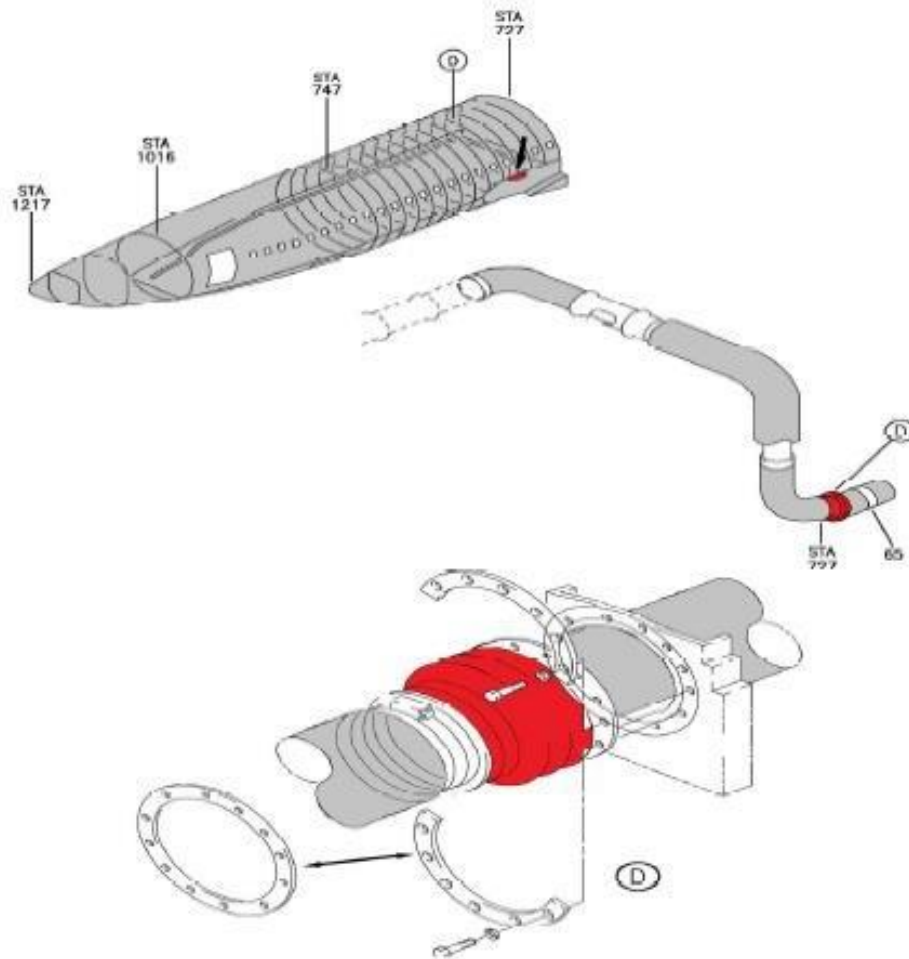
REPLACEMENT: AFT APU WHEEL WELL SLEEVE.
